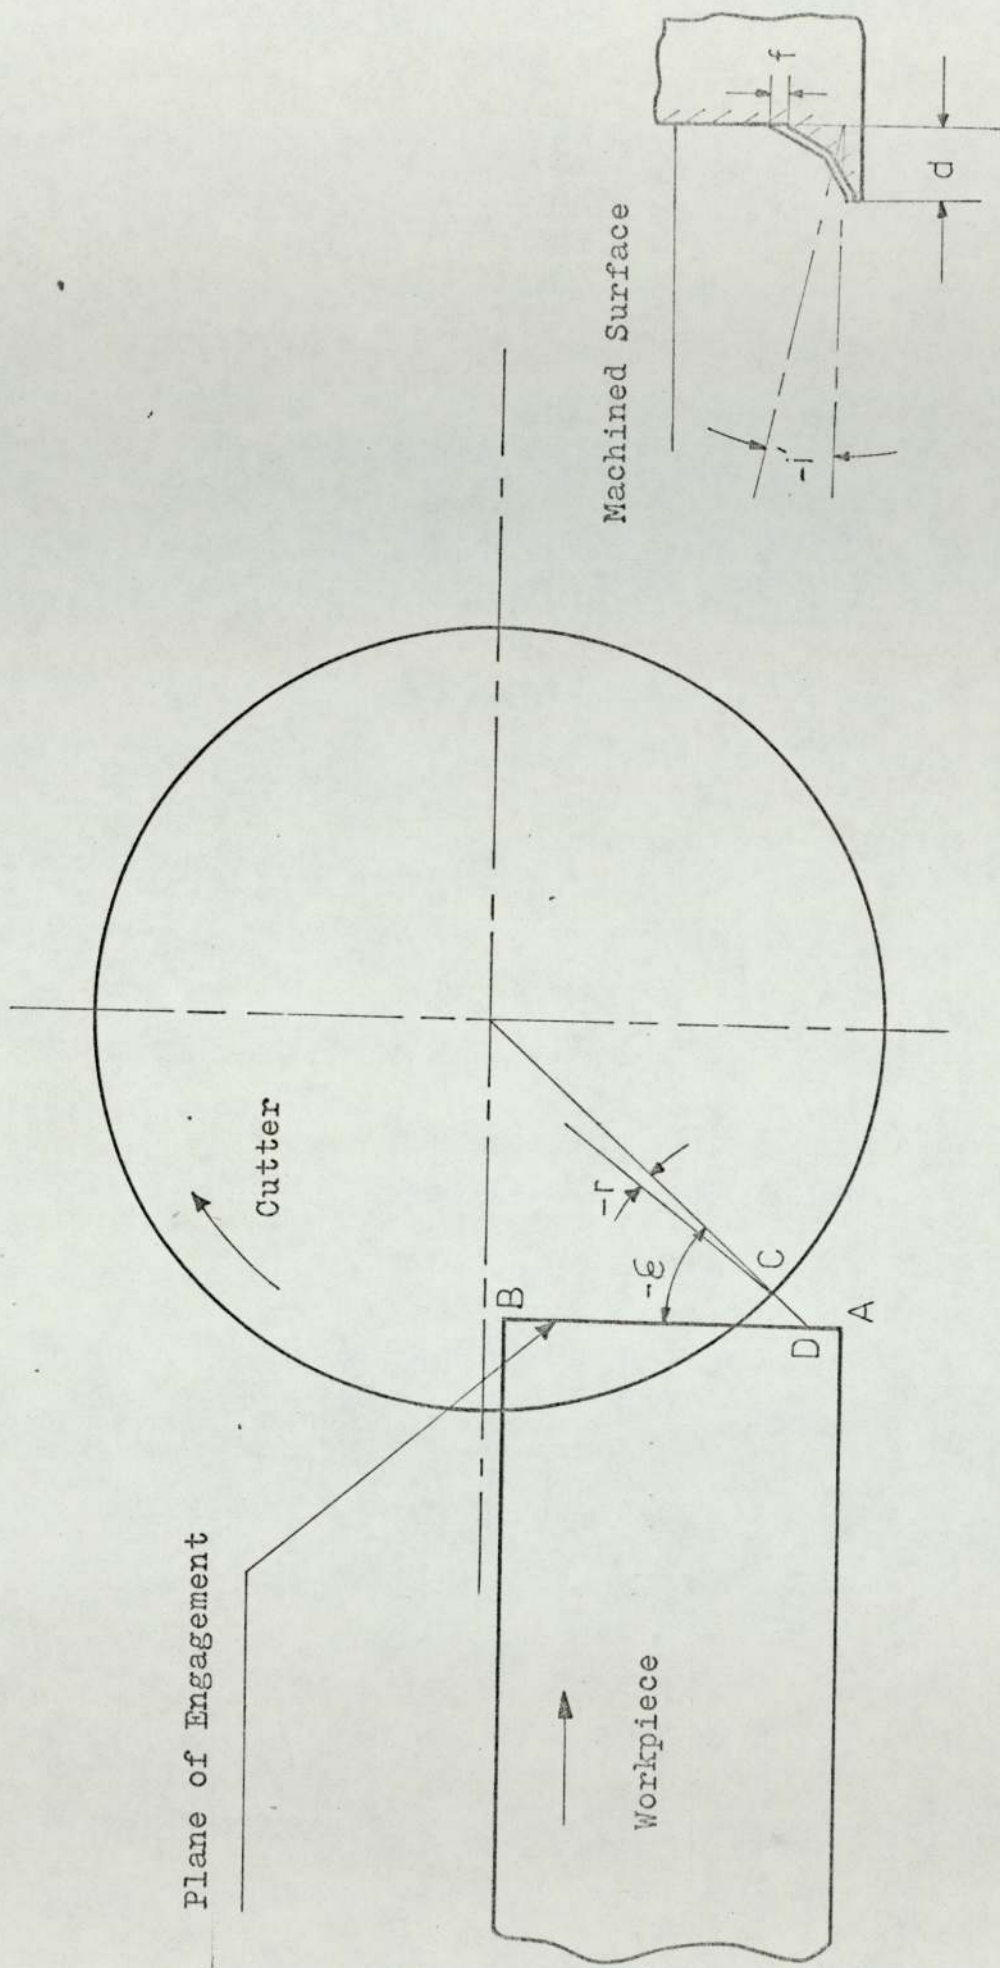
The Intersection Angle i' in Up-Cut Milling using the Sandvik Cutter
